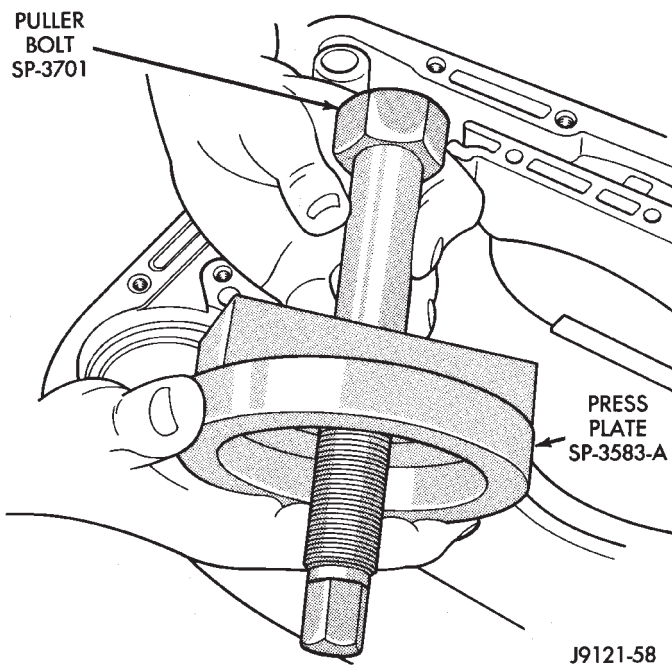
Assembling Clutch Cam Puller Bolt And Press Plate
